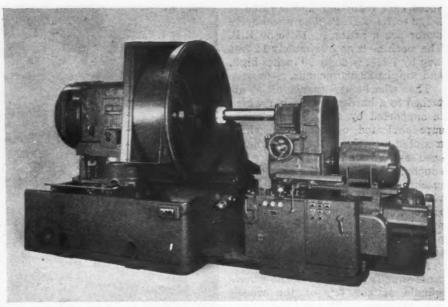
Large-swing Internal Grinder Built by Bryant Chucking Grinder Co.
